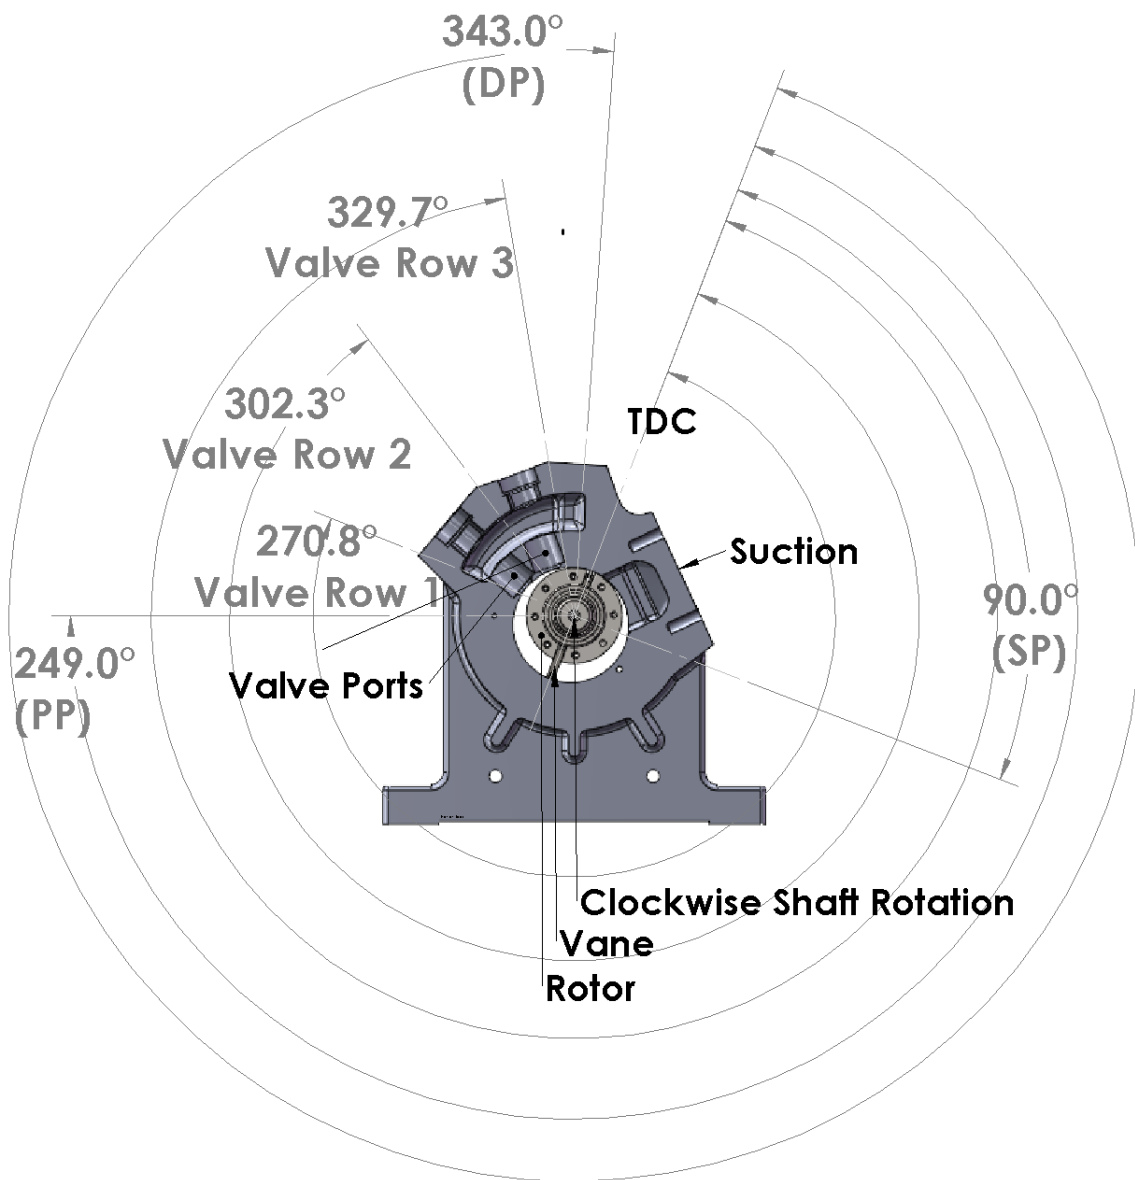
Axial view of compressor cylinder block highlighting the angular location of in-pocket sensors and valve location relative to vertical and the compressor top-dead-center (TDC).
